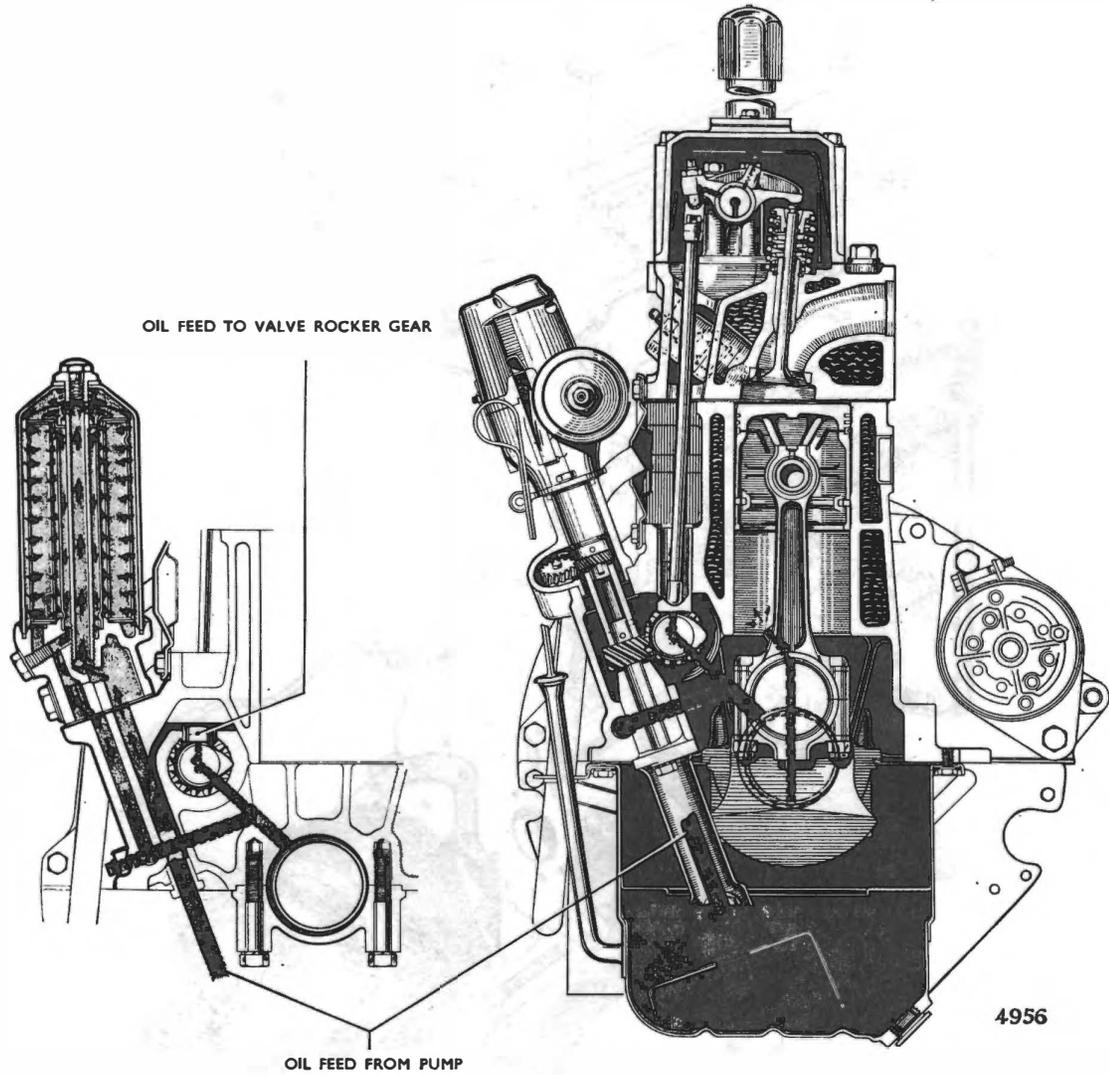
Engine—Cross section (1494 c.c. engine shown)
